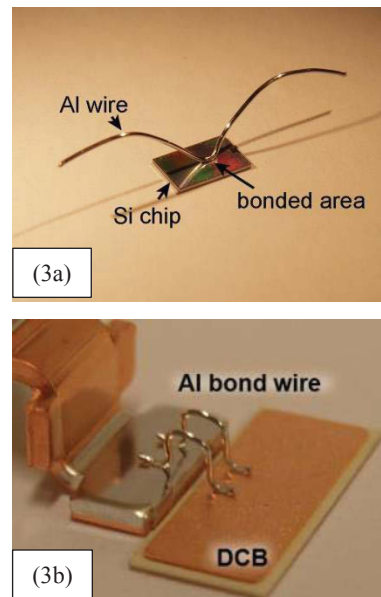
, b: Wire bond specimen geometries for mechanical fatigue testing
